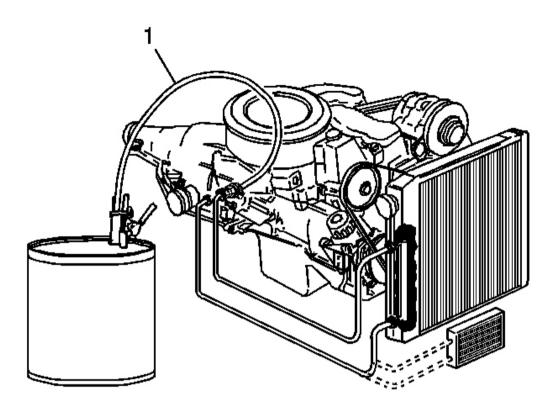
Clipping The Discharge Hose To An Empty Oil Container Courtesy of GENERAL MOTORS CORP.
